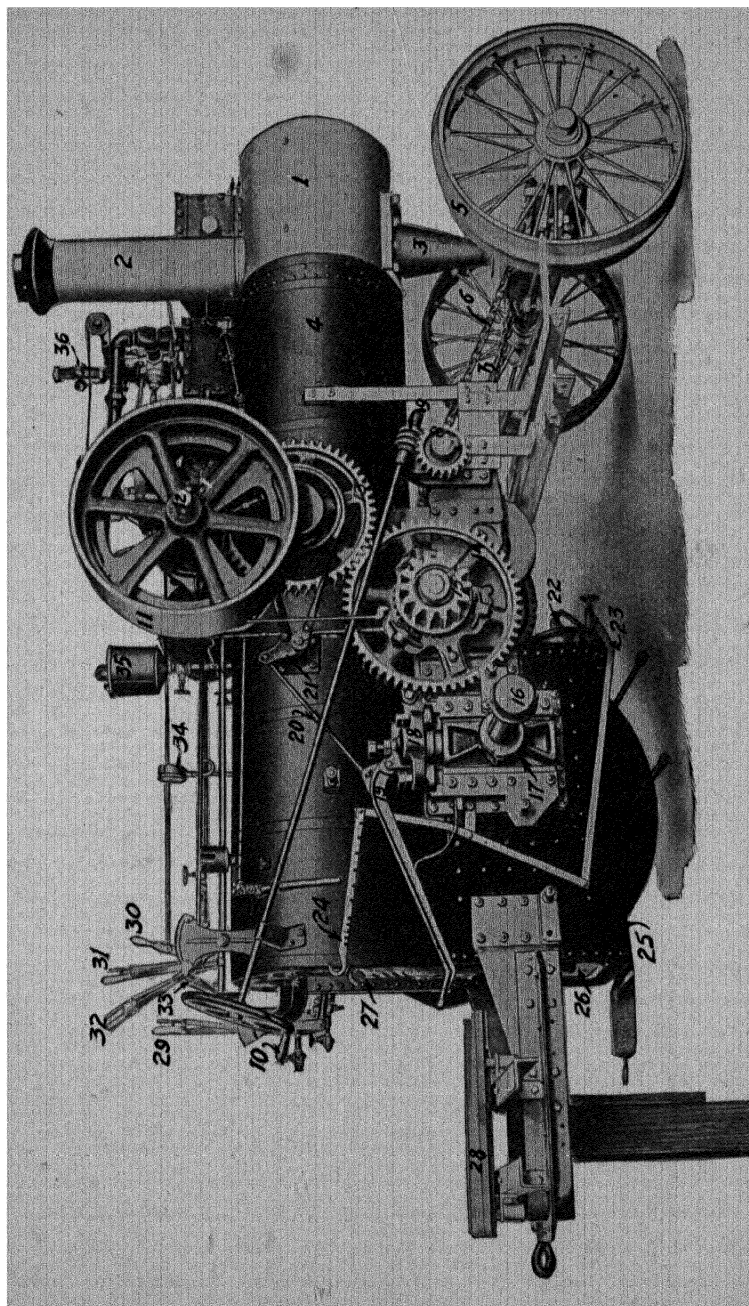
Traction Engine with Rear Wheels, Platform and Side Tanks Removed to Show Steering and Driving Mechanism
